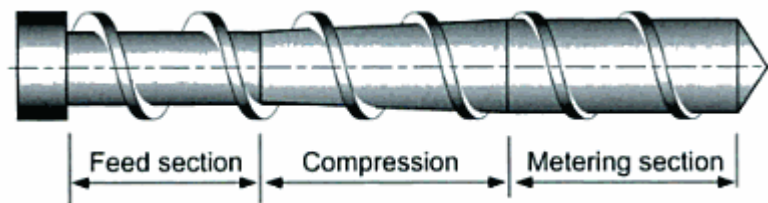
Screw geometry of conventional extruder screw (Rauwendaal 2001, 12)
